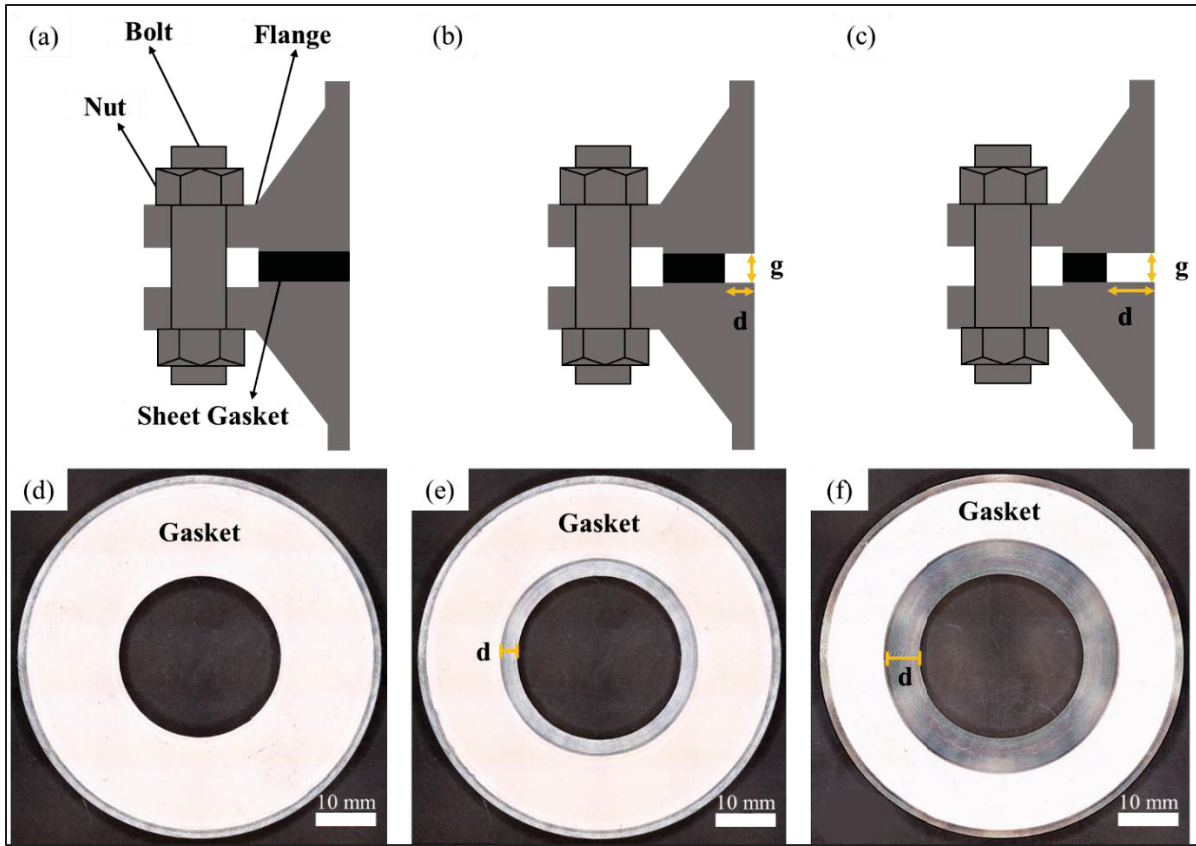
Configuration of the flange and gasket in a real bolted flanged gasketed joint: (a) schematic cross-section illustrating the bolted flanged joint with a full-face gasket, including component identification; (b) schematic cross-section of the bolted flanged joint with a gasket featuring an ID of 36.05 mm, with yellow arrows indicating variables d and g ; (c) schematic cross-section of the bolted flanged joint with a gasket having an ID of 48.26 mm, with yellow arrows indicating variables d and g ; (d) image depicting the sample plate and gasket with an ID of 33.27 mm; (e) image showing the sample plate and gasket with an ID of 36.05 mm; (f) image illustrating the sample plate and gasket with an ID of 48.26 mm
